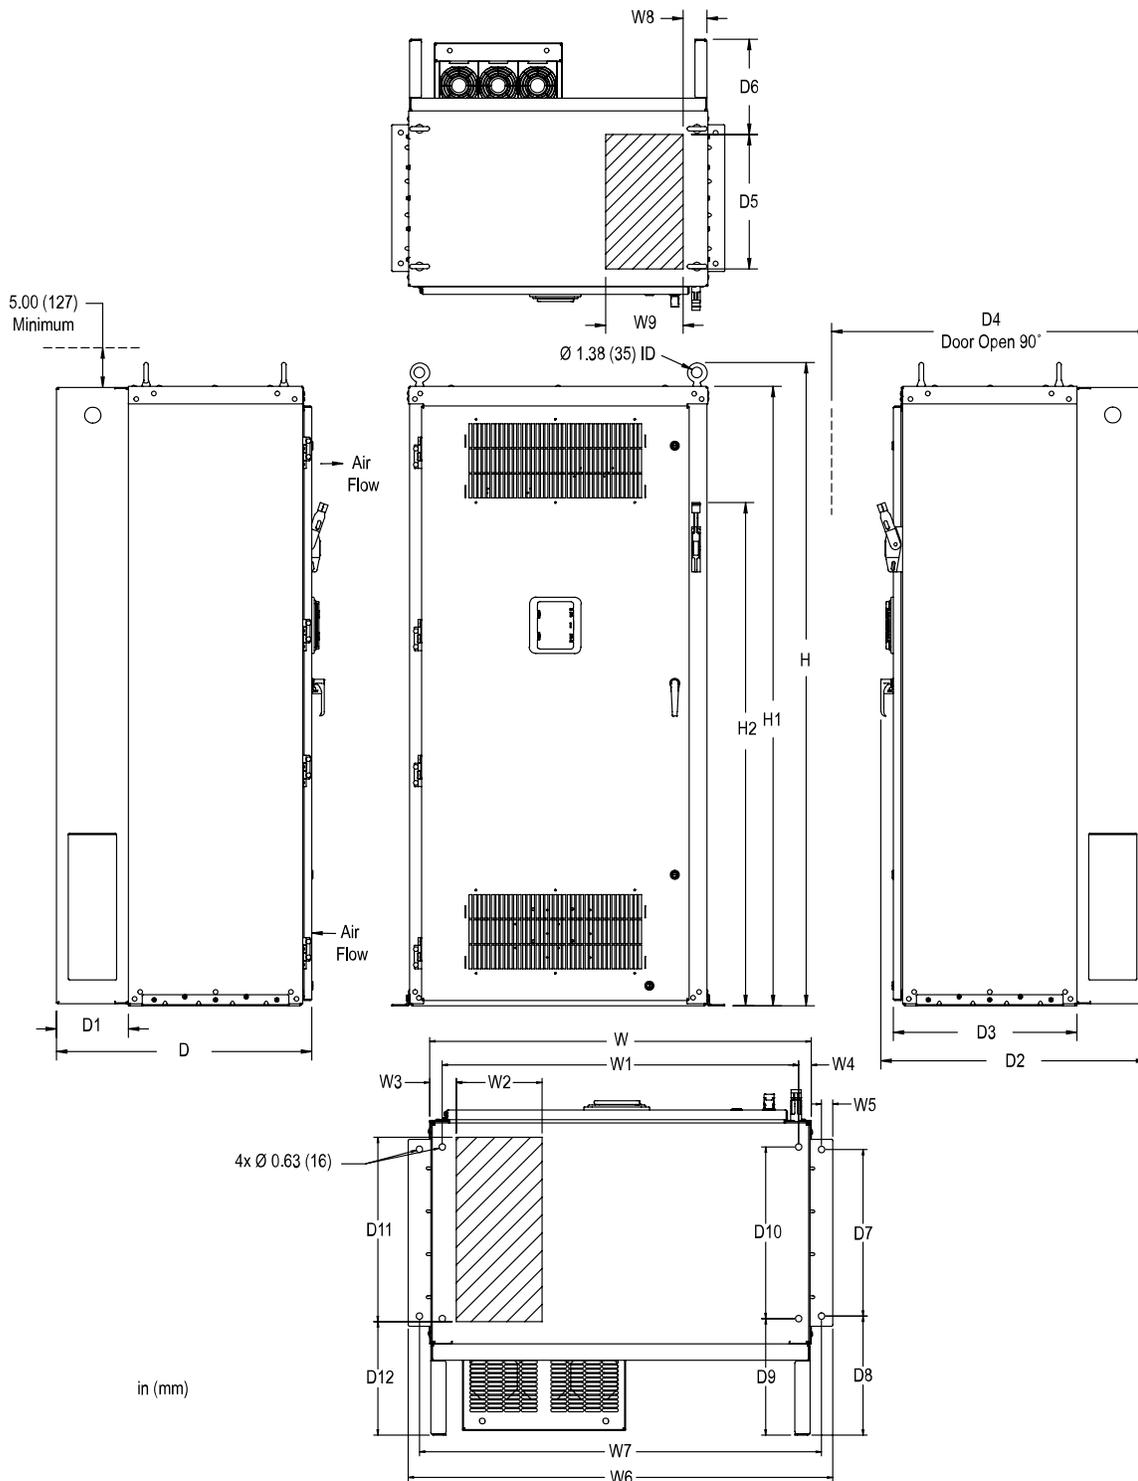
Enclosed Exterior and Mounting Dimensions Diagram
